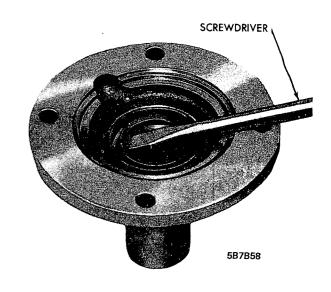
B-58 - Removing Bearing Retainer Oil Seal
